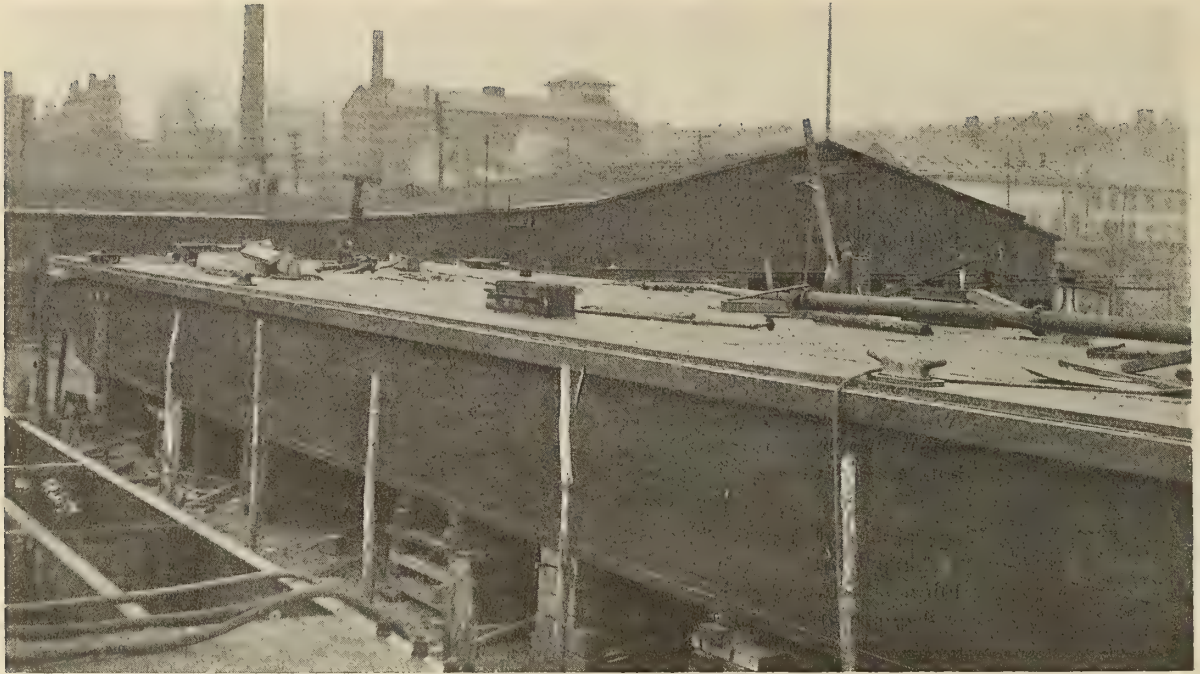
Riveted Barge Ready for Launching. The Same Ways Were Afterwards Used for Construction of Welded Barge of Same Type
